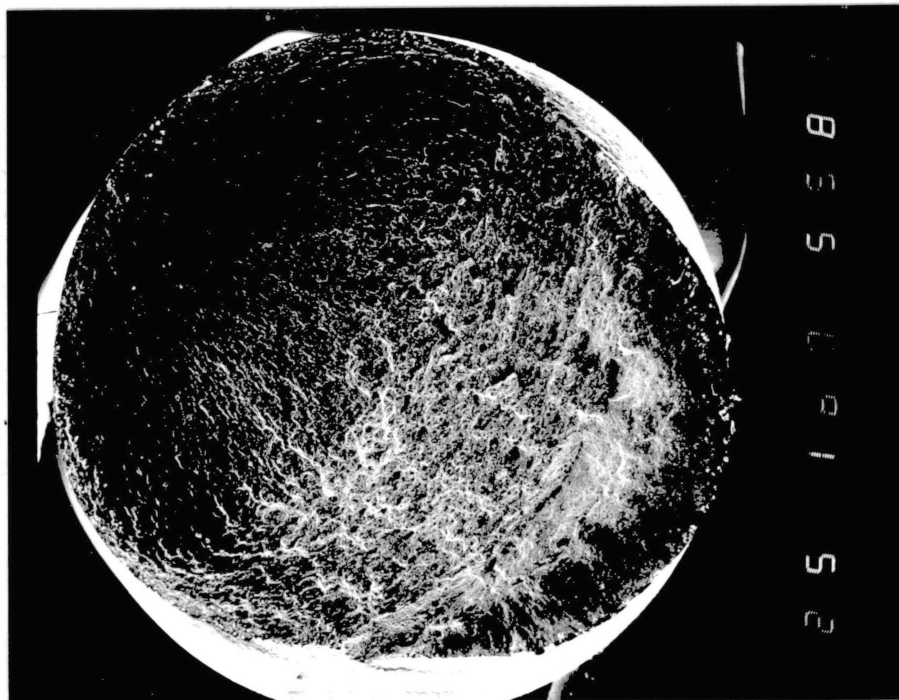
Fracture Surface of Small Grained Incoloy 800 Fatigued
